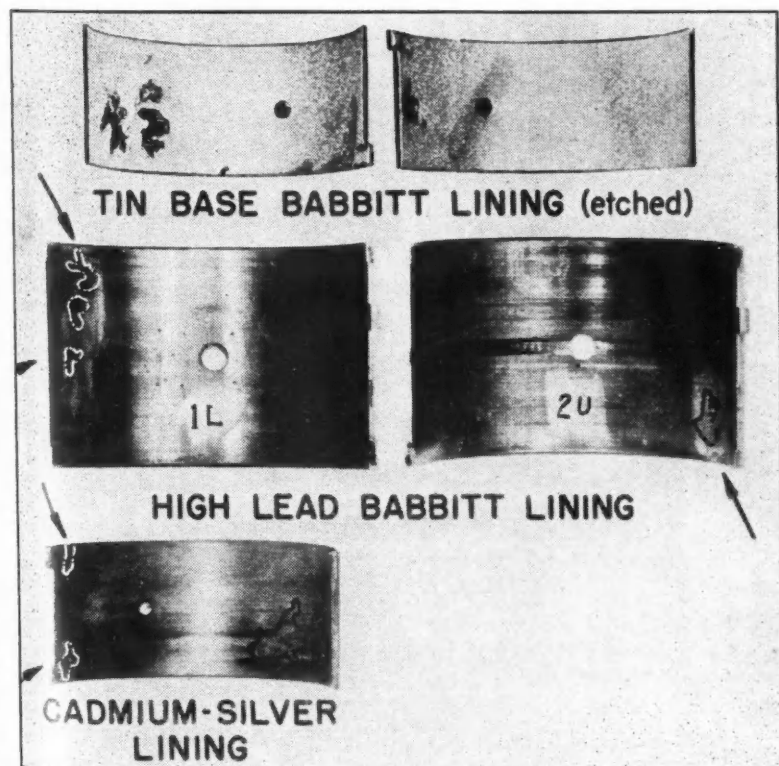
Very thin steel-back connecting-rod bearings with areas of failure adjacent to parting lines
